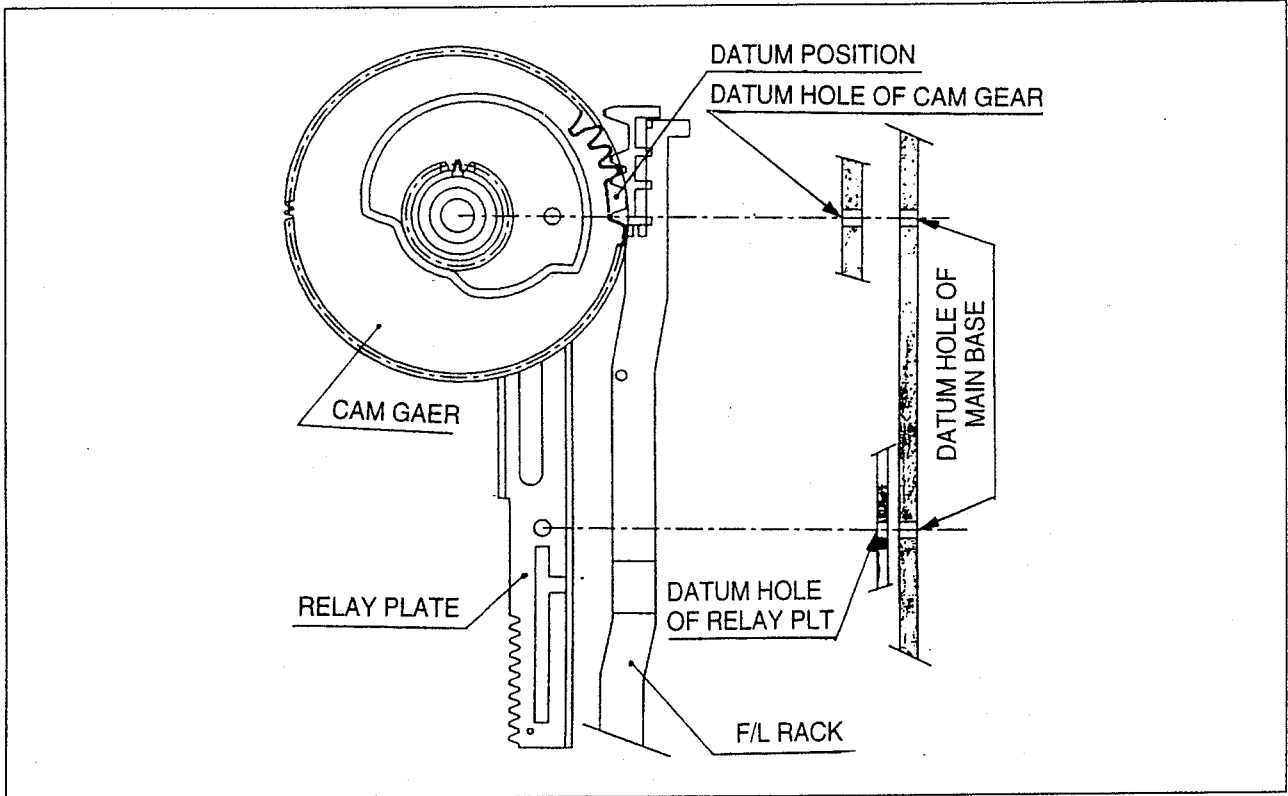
DATUM POSITION OF RELAY PLATE & CAM GEAR
